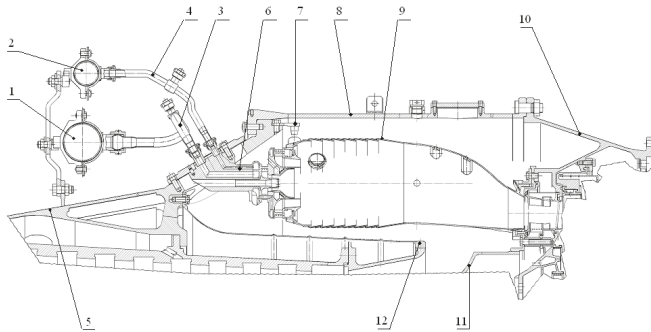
Low-emission combustor of a GTE with power 25 MW: 1, 2 – collectors of the first and second channels; 3, 4 – delivery pipes of the first and second channels; 5 – compressor body; 6 – burner; 7 – holder; 8 – combustor casing; 9 – flame tube; 10 – load-carrying body; 11 – diffuser; 12 – inner casing
